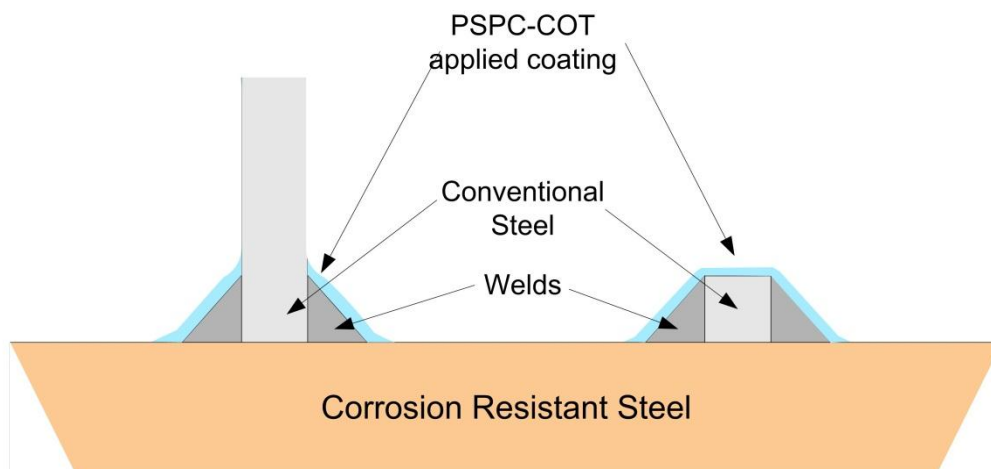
Range of coating when work attachments are welded to corrosion resistant steel
